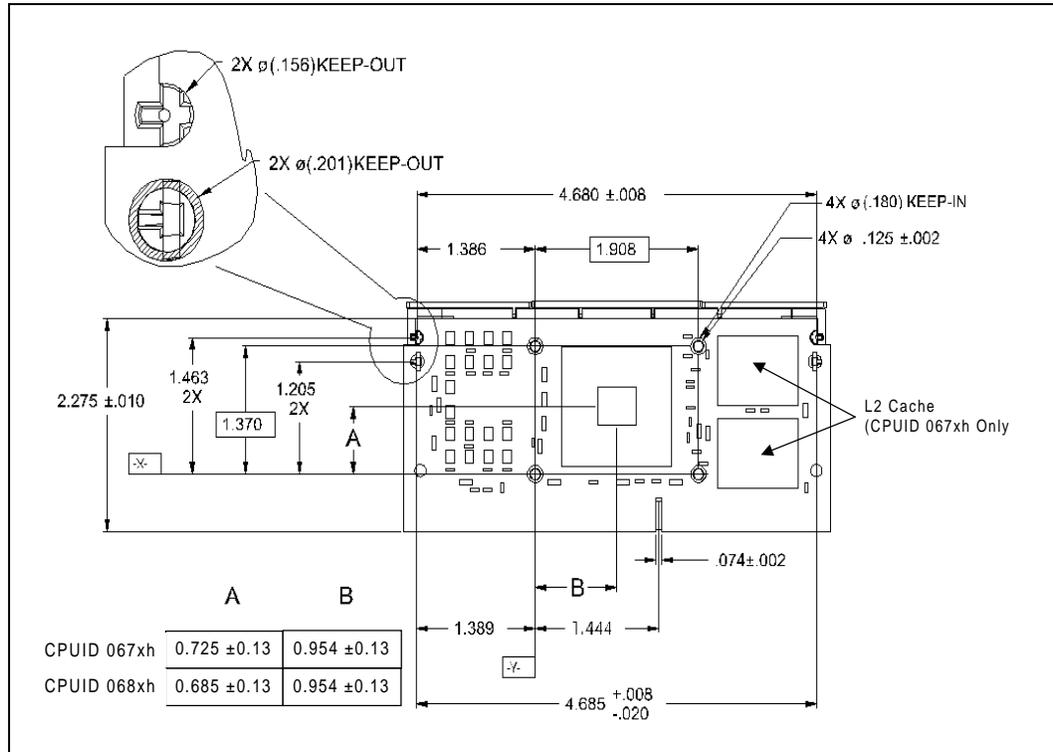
S.E.C.C.2 Packaged Processor Assembly — Cover View with Dimensions
